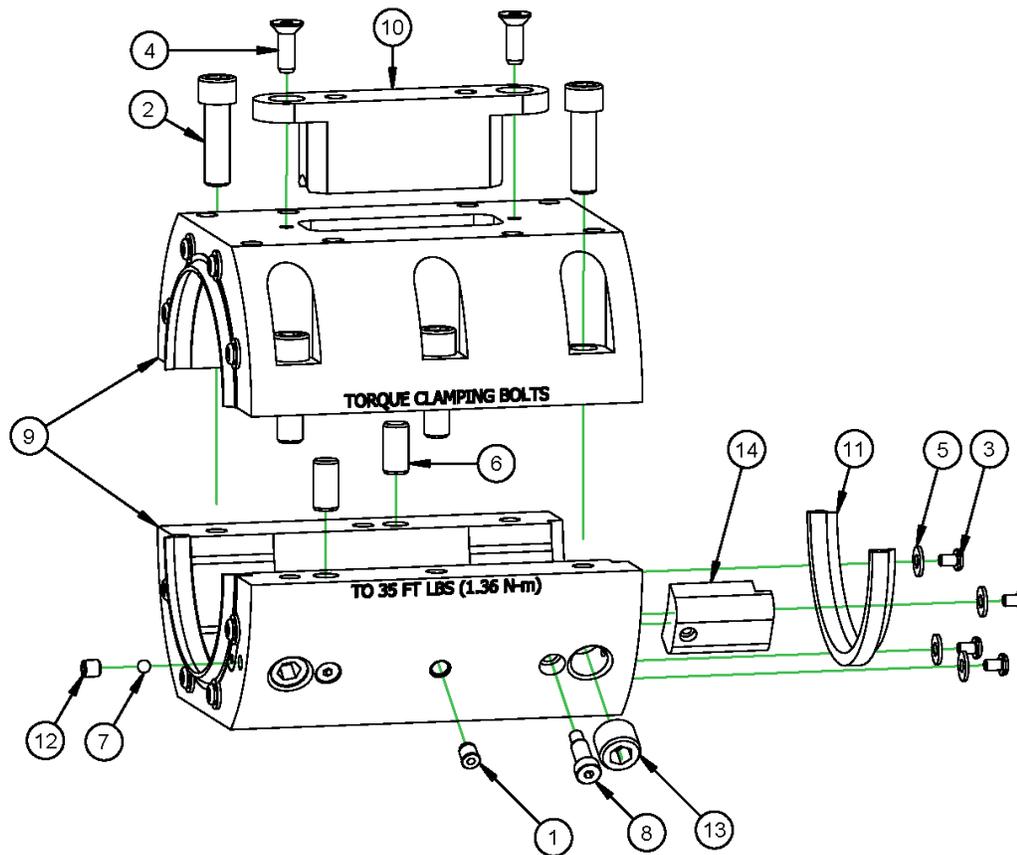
BORING DIAMETER RANGE STACK-UP BLOCKS ASSEMBLY (P/N 81249)
